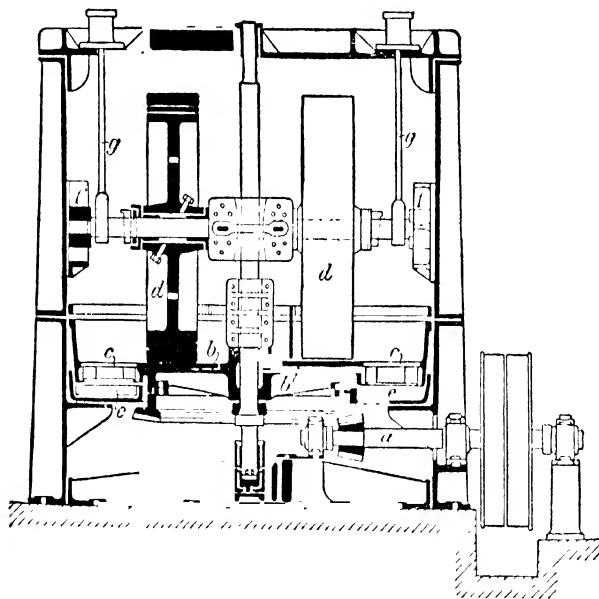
Roll mill with rotating grinding track and renewal sieve plates. Section.
